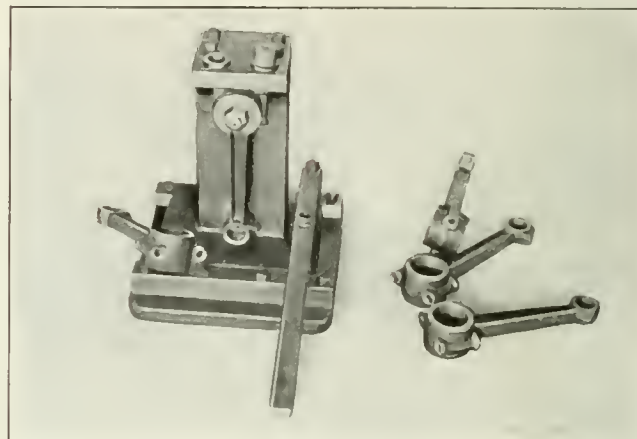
Jig for Drilling the Holes in the Connecting-rod Caps
